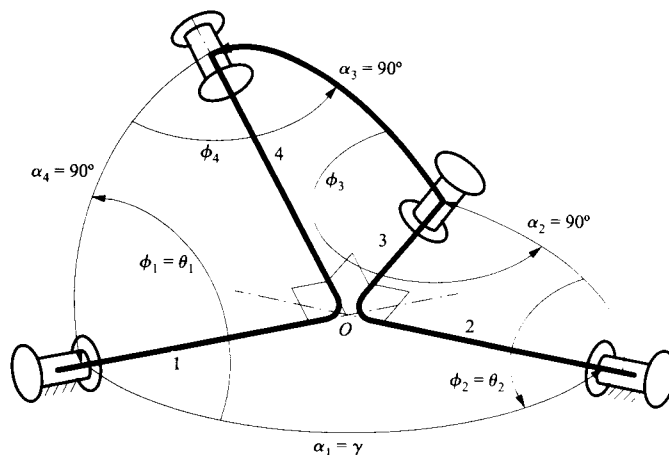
Universal, Cardan, or Hooke joint.
